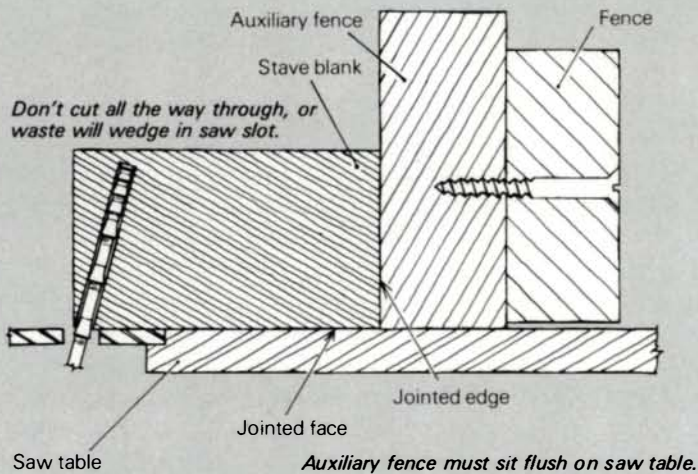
To set precise bevel angle of blade, begin with arbor tilt slightly larger than 75° and lock fence for cut 3/16 in. larger than final width. After cutting 12 sample staves, a gap should result. By decreasing the angle of the blade and the width of cut in small amounts, the gap is finally closed and an accurate setting obtained.
